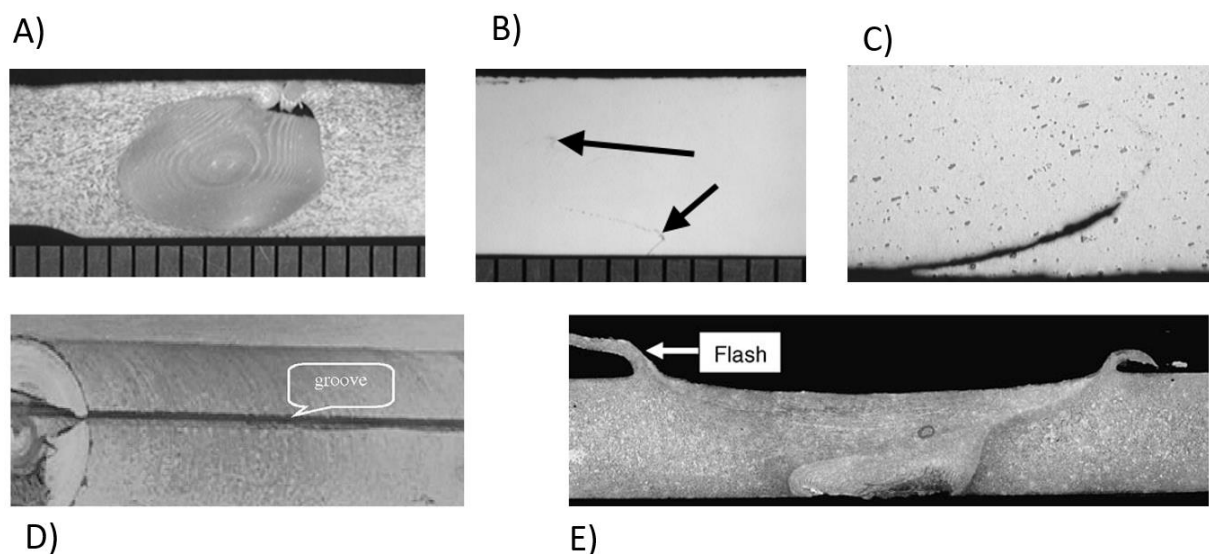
FSW defects: A) Void; B) Joint line remnant; C) Root flaw; D) Surface groove; E) Excessive flash.
